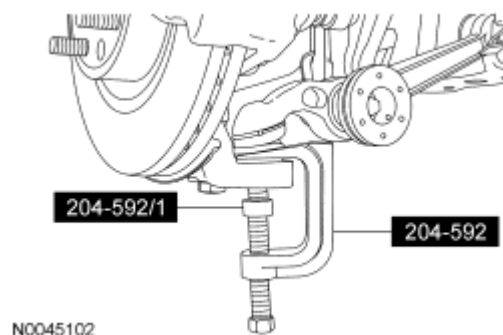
Identifying Special Tool 204-592/1 And 204-592
